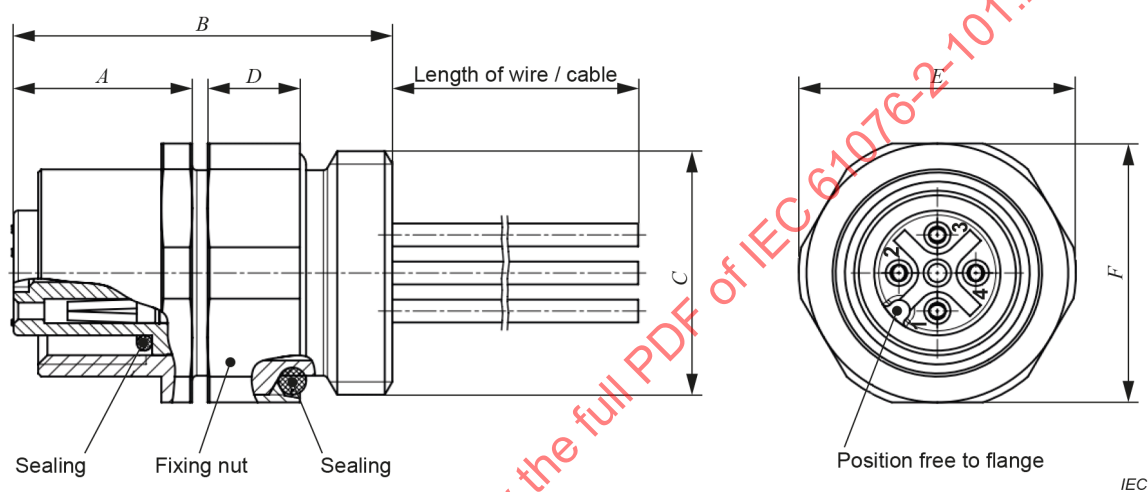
Fixed connector, female contacts, with wire / cable, single hole mounting thread M16 × 1,5, mounting orientation
